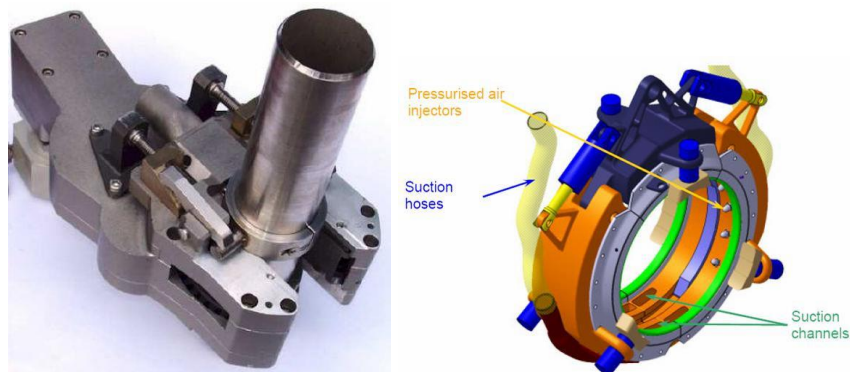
Universal cutting tool LEFT: commercial model and RIGHT: drawing[4]
